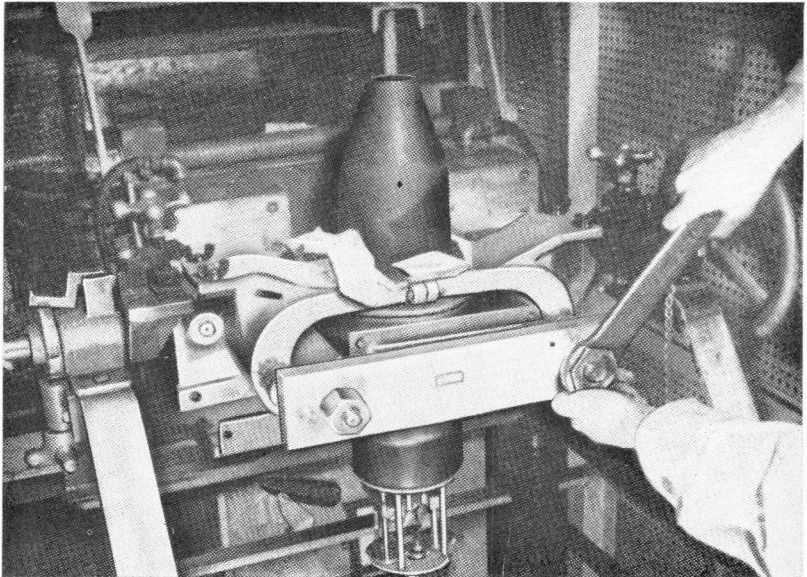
Set-up for magnetizing the ring-magnets of a magnetron after assembly. The silver-plated shorting bar is secured to the conductors with non-magnetic nuts.
